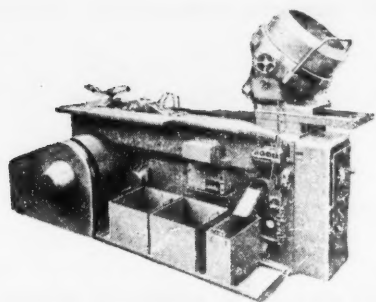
Hatebur press for upsetting holes prior to threading, and ejecting the punchings.
